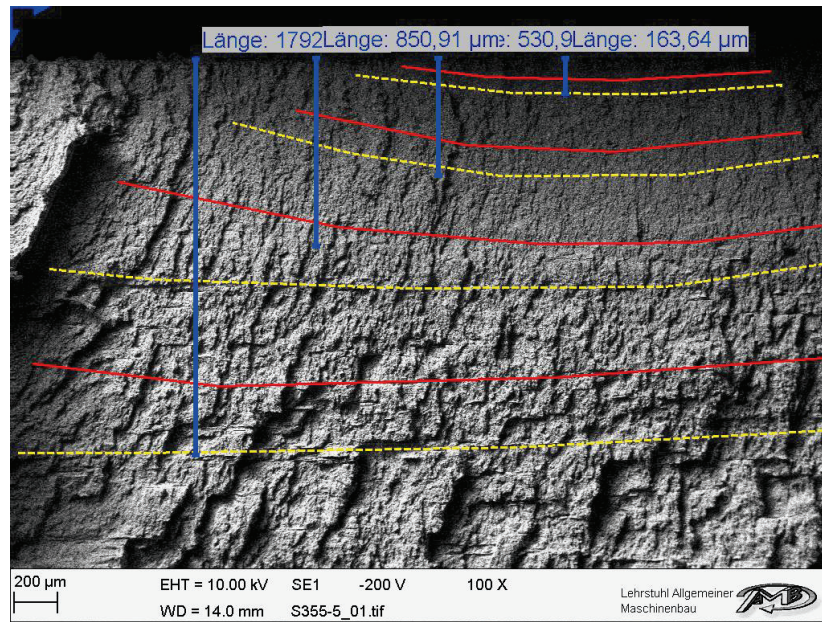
Fracture surface of specimen number 1 of S355 block testing
